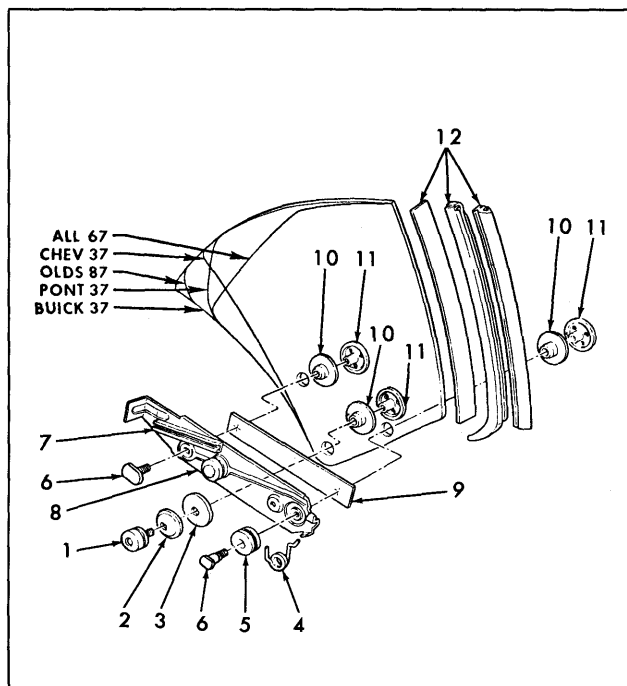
Rear Quarter Window Assembly "A - 37, 67, 87" Body Styles
